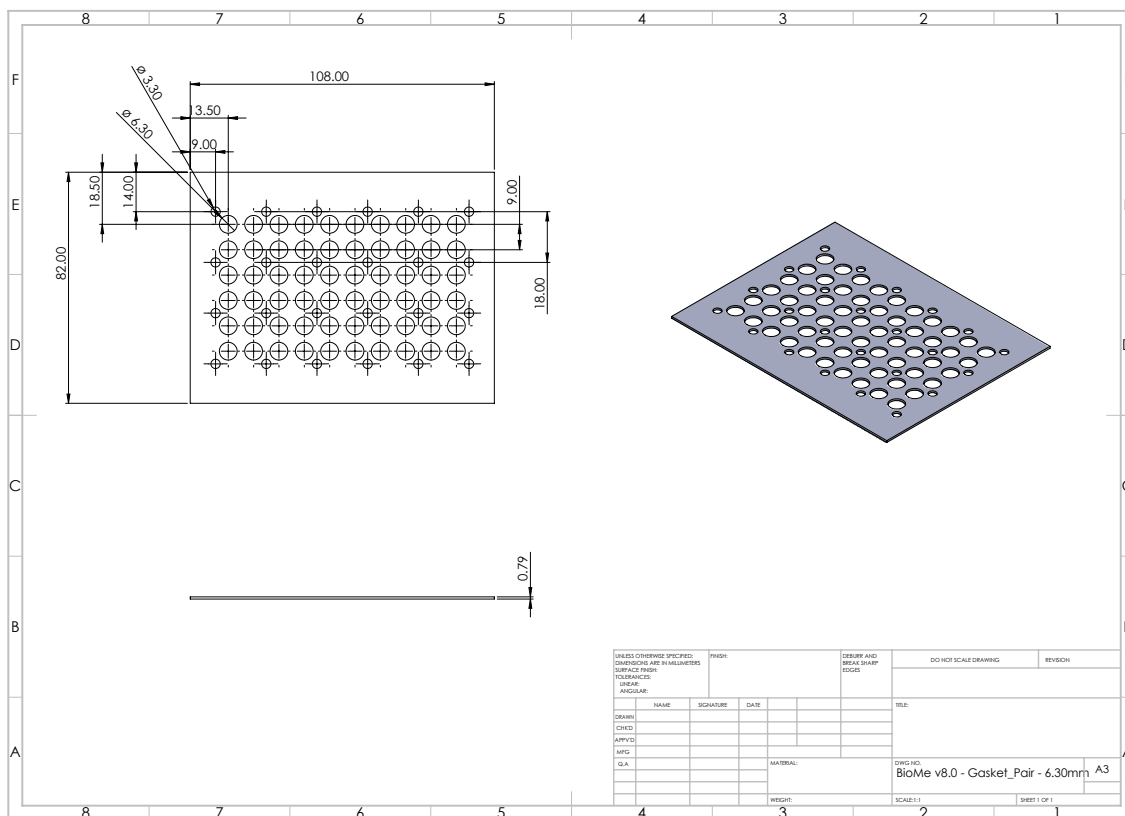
SolidWorks CAD drawing of laser-cut food-grade silicone gasket
